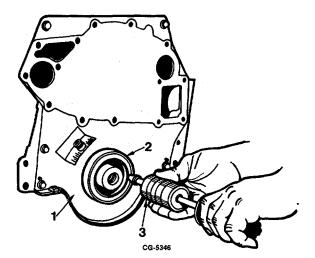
Front Cover Oil Seal Removal with Cover Installed Using SE-2091 Puller
